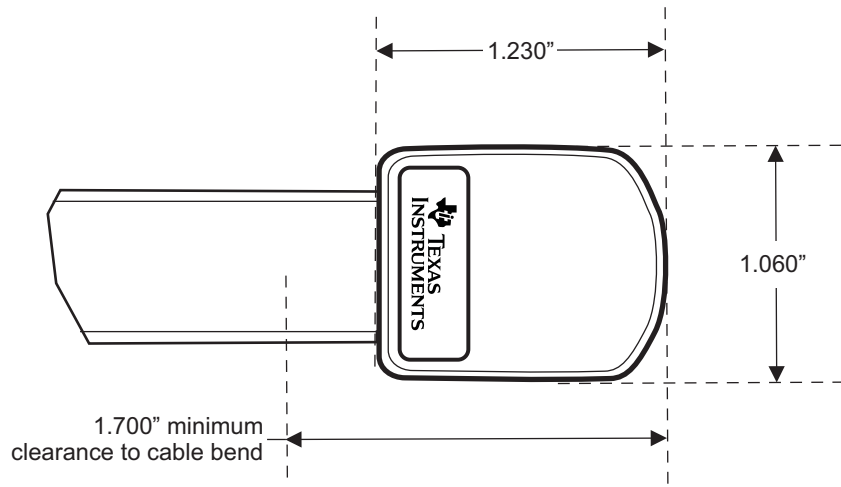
Emulation and Debug Pod Header Enclosure Dimensions
